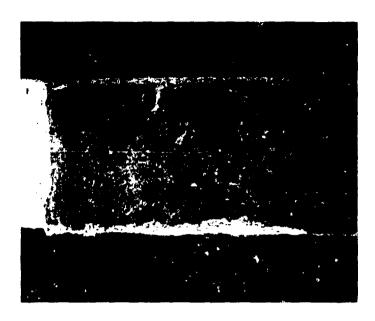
Fracture surface of a hydrogen-charged A-242 longitudinal tensile specimen, 10x.
